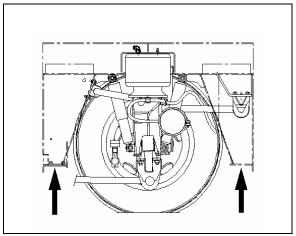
JACKING POINTS ON FRONT UNDERFRAME – I BEAM AXLE
